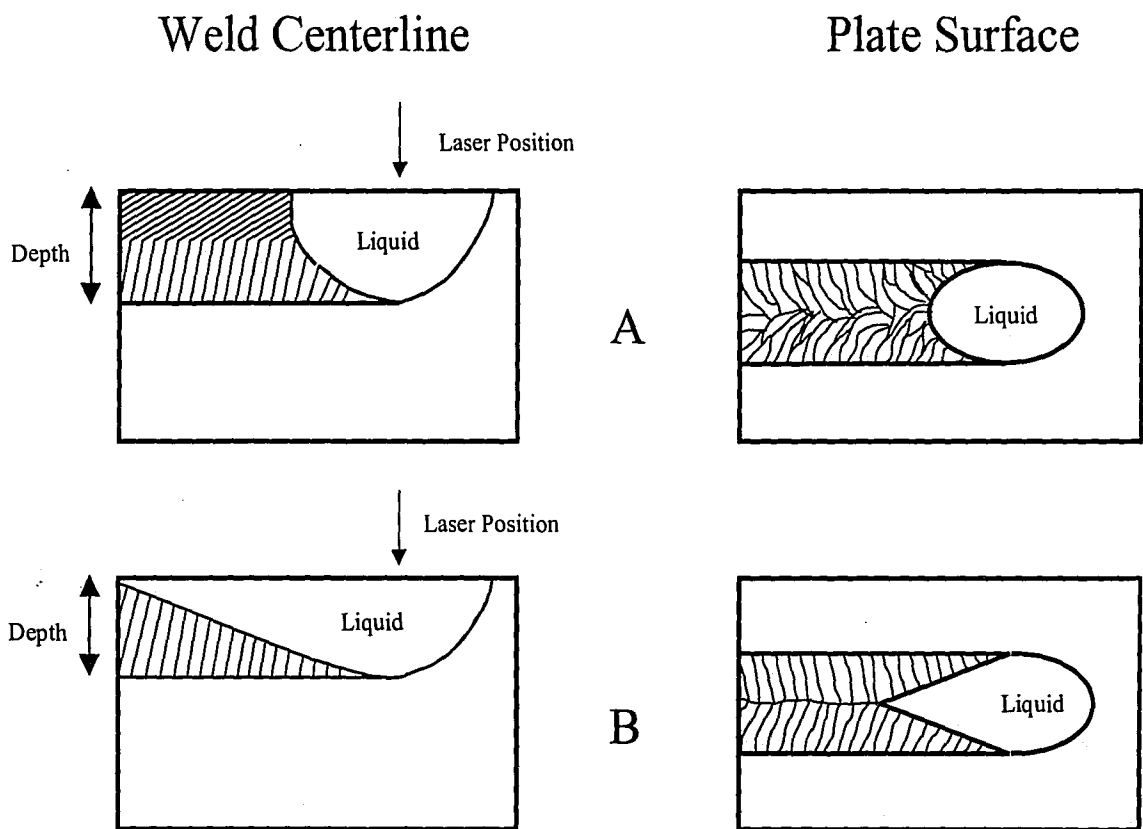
Schematic of solidification sequence for A) hemispherical weld pool shape laser welds and B) tear drop shape weld pool laser welds.
